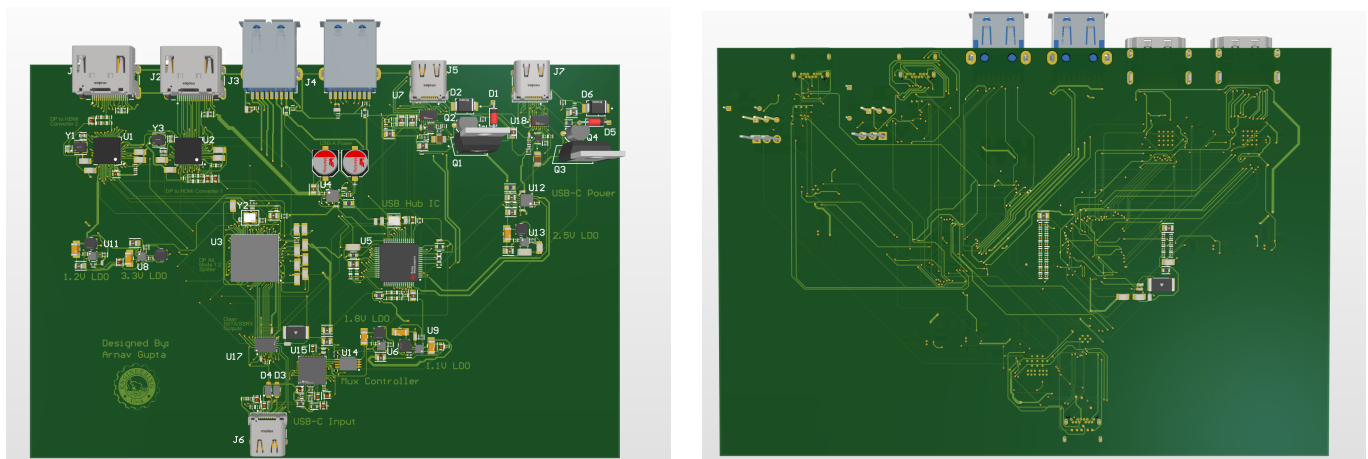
USB 3.0 Hub PCB — Top and Bottom Layers
